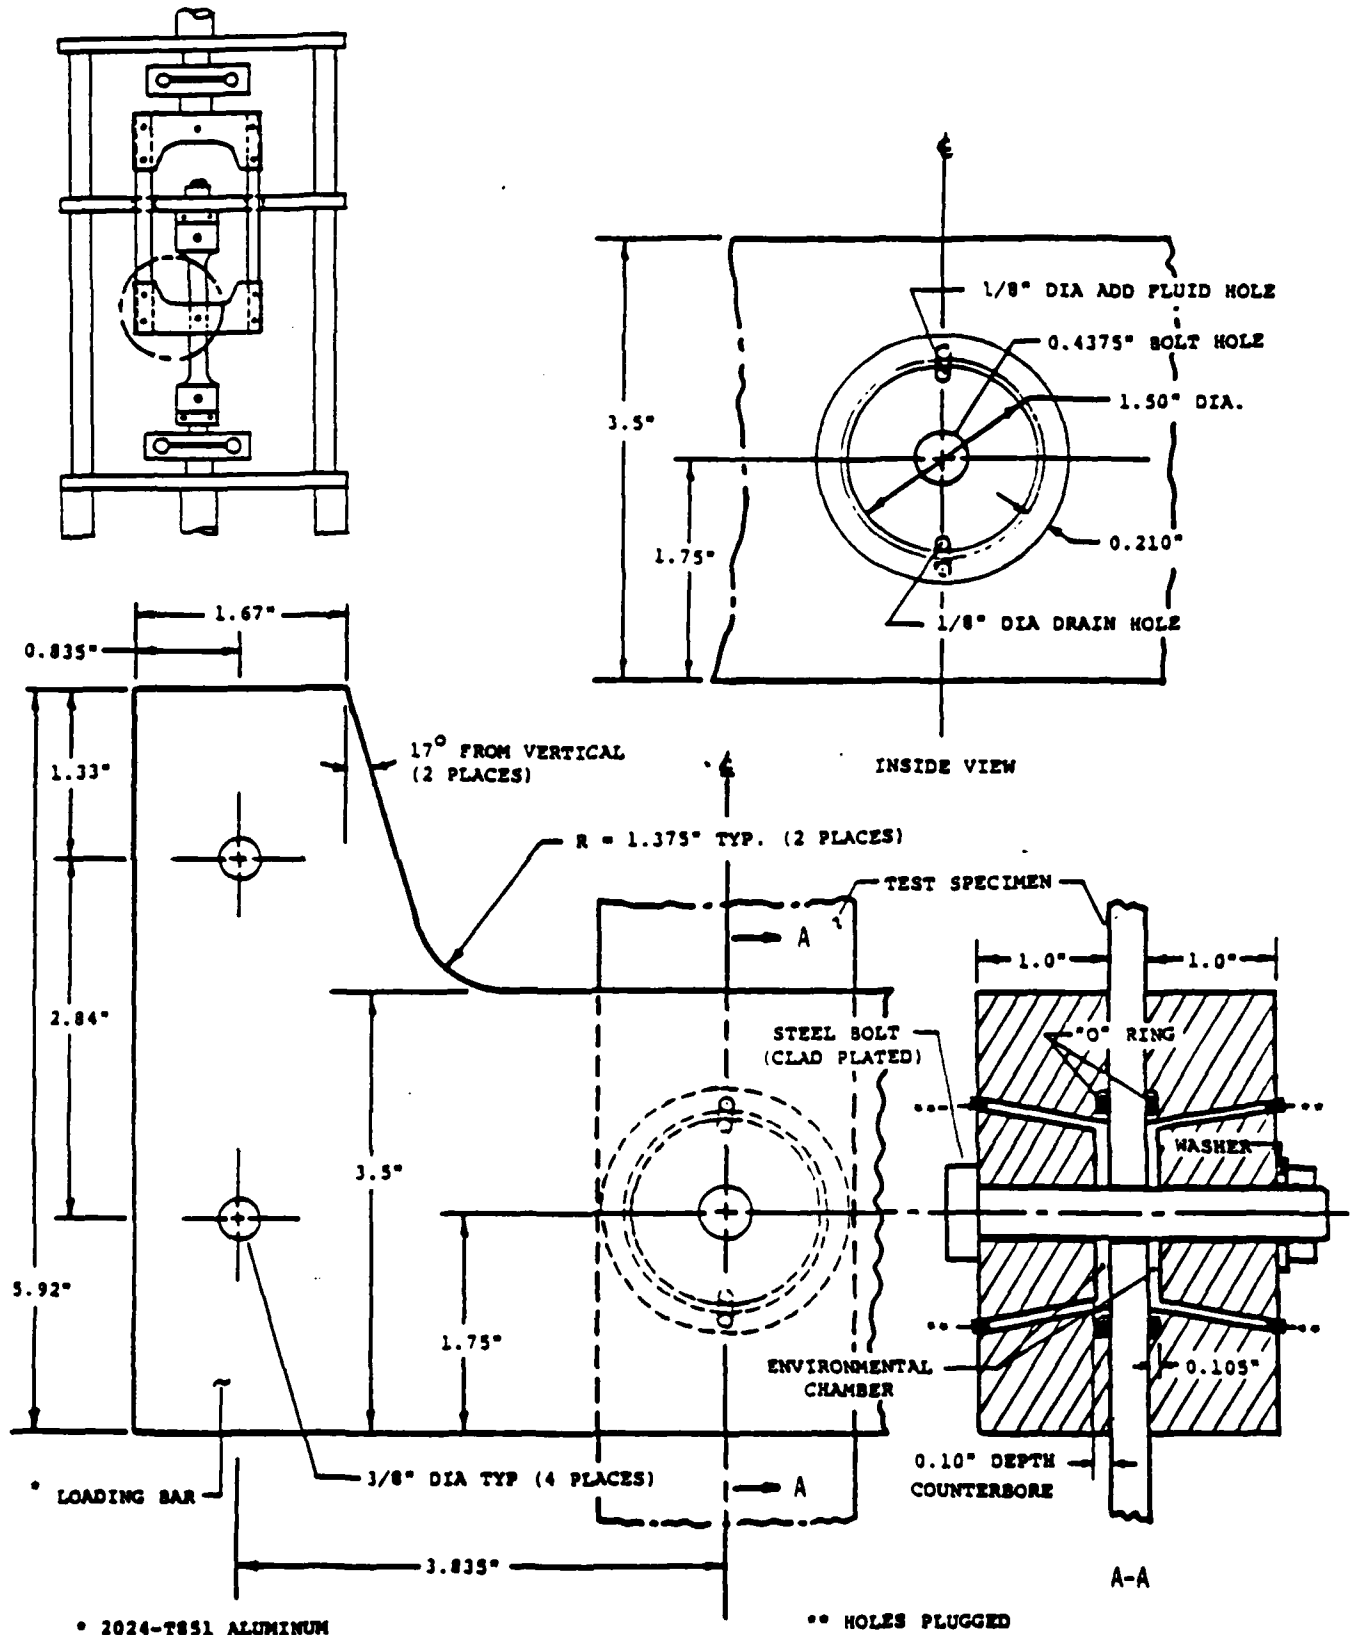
Details of Integral Environmental Chamber Used In Loading Bar for Bolt Load Transfer Tests
